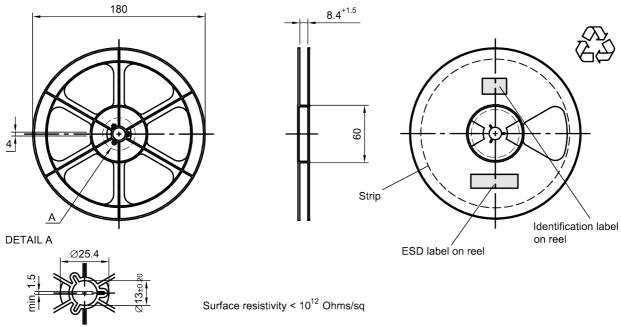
Drawing of reel (first-angle projection) with diameter of 180 mm.
